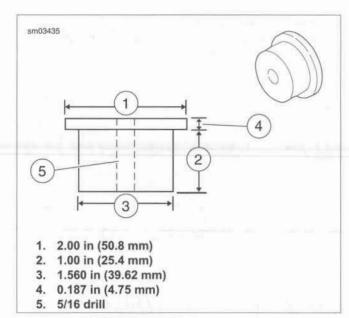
Pinion Shaft Outer Race Installation Tool
